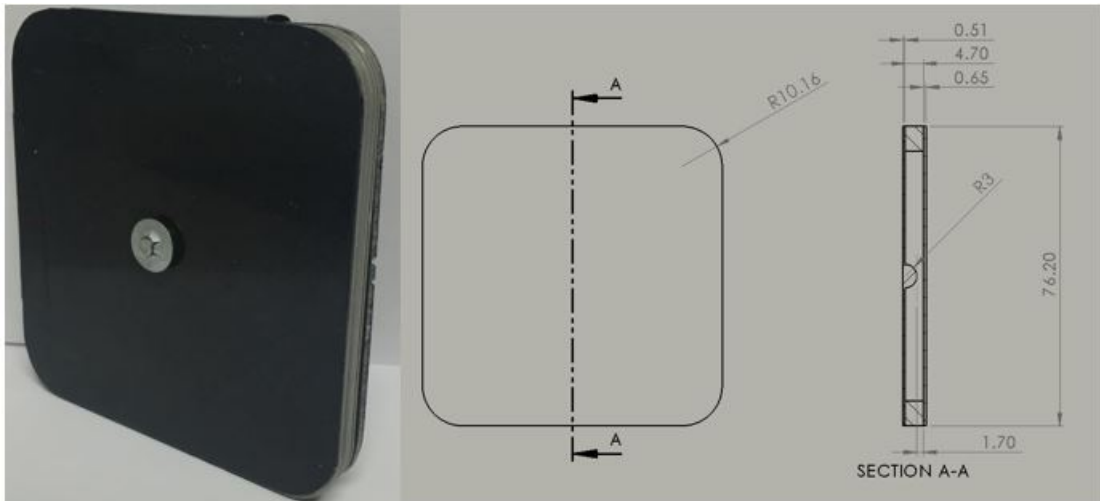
Assembled MIVIS unit cell test article (left) and its drawing with cross sectional view
